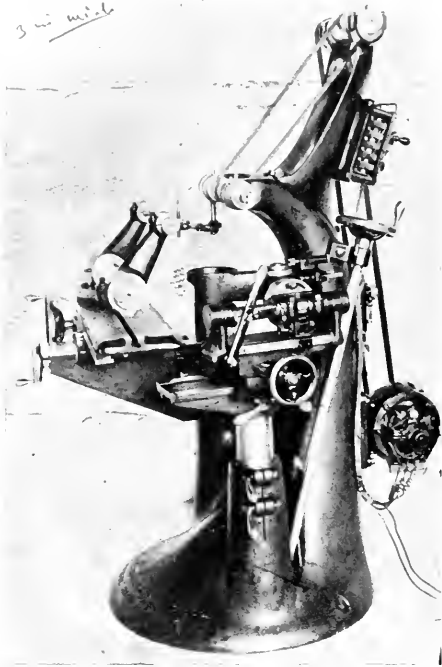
No. 1. Fourteen-inch Cutter and Reamer Grinder (Motor Drive).
